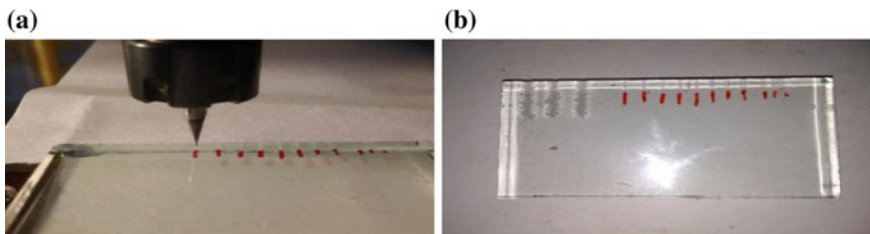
Experimental setup a micro-end milling, b machined component
